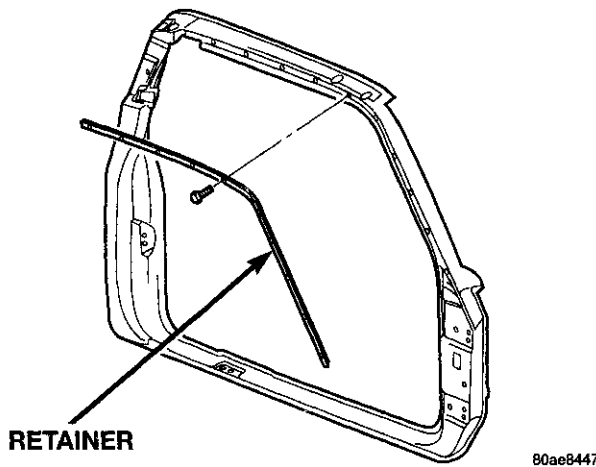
Roof Rail Weatherstrip Retainer—Quad Cab
